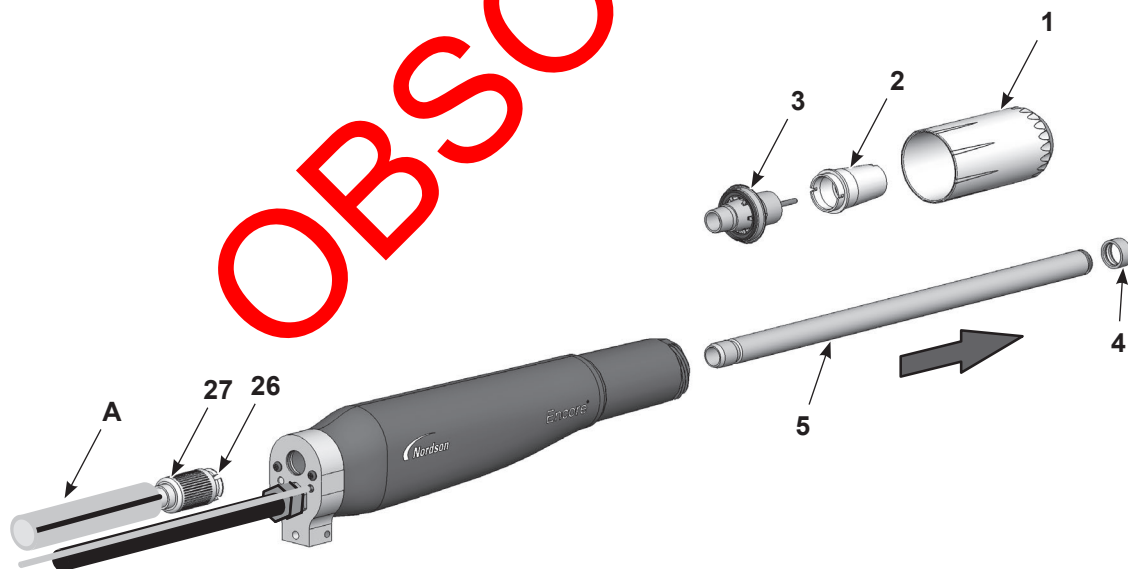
Maintenance – Bar-Mount Gun Shown without Pivot Mount
